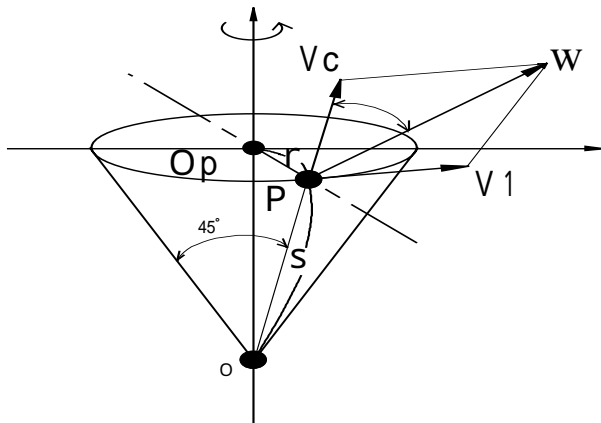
Lead angle of WN spiral bevel gear processed by spherical tool
